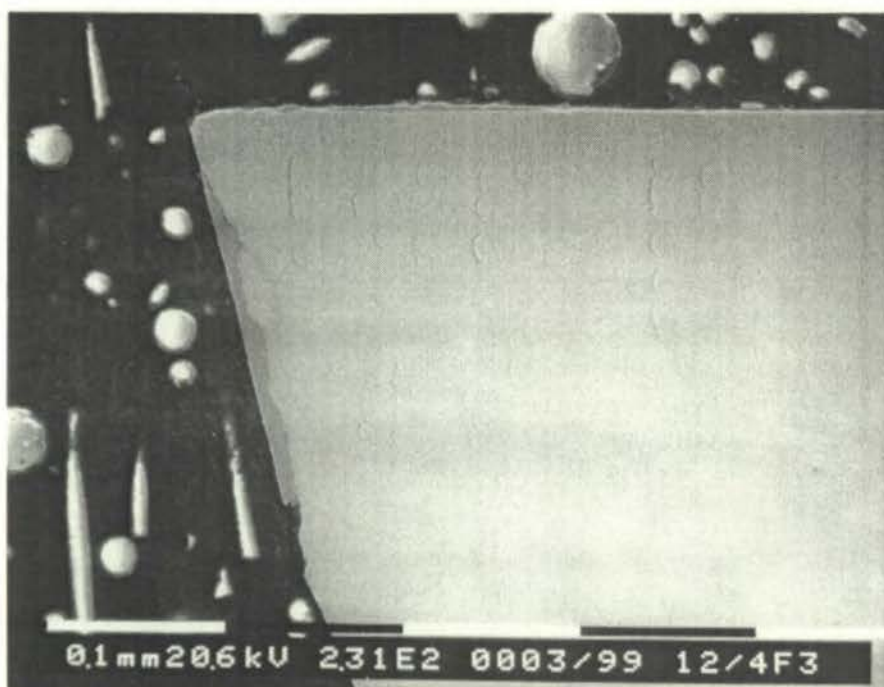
21 Sectioned KMF tool showing workpiece adhesion over plucked flank and a developed crack after cutting Inconel 718 for 22 minutes at 25 m/min and 0.14 mm/tooth.
